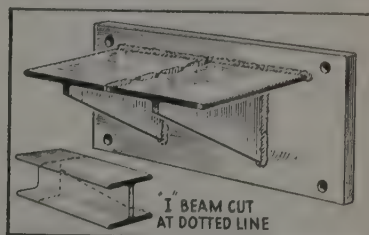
Alternate welded design for low-cost construction. Standard "I" beams are cut and fillet welded to supporting member.
